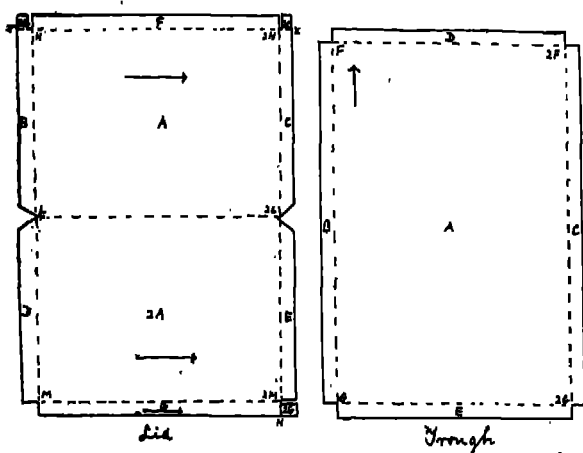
LARGE TWO-PIECE BOX OF CARBON PAPER PACKERS.
